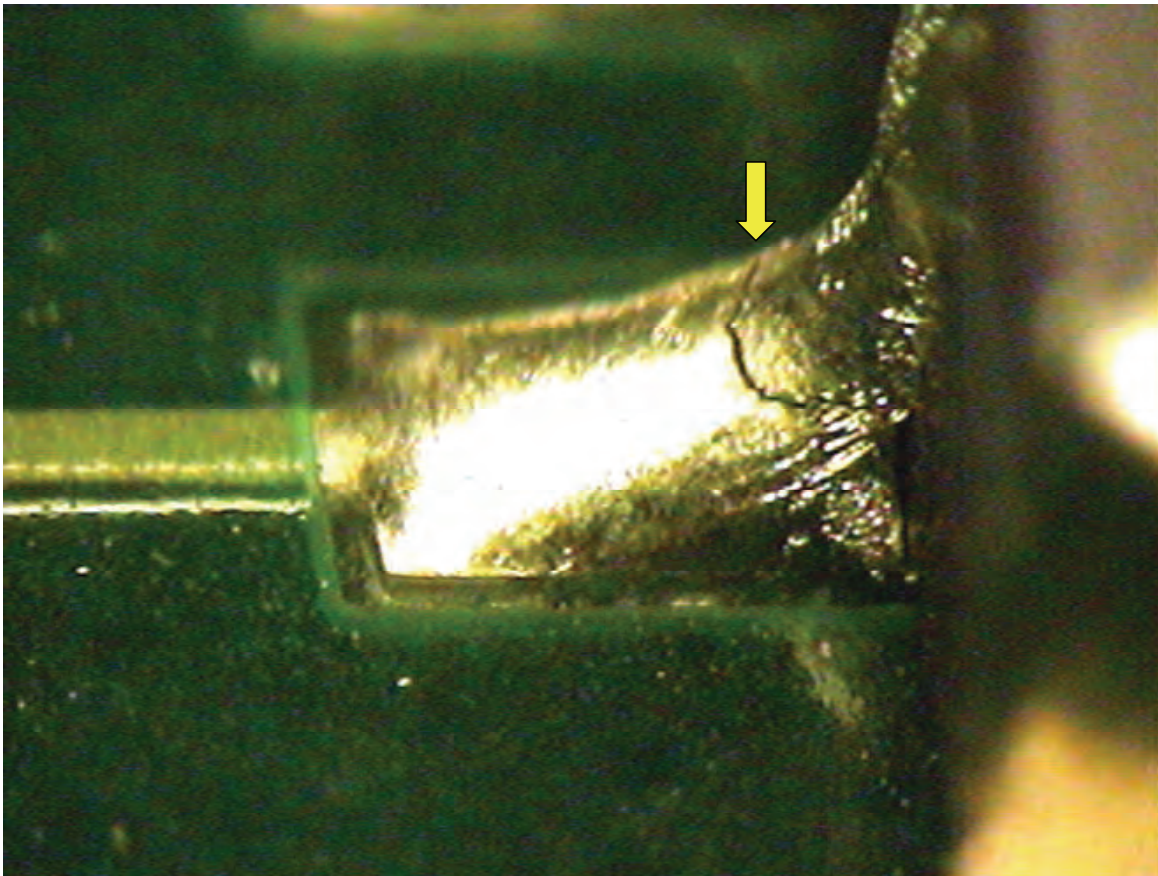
CLCC U10 with Cracked Solder Joint (SnPb/SAC305)
